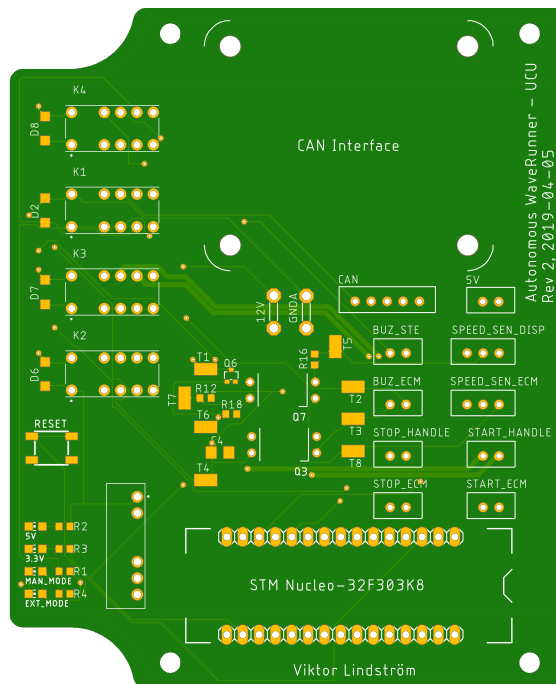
Top side of the UCU-Rev2 PCB from Autodesk Eagle.
